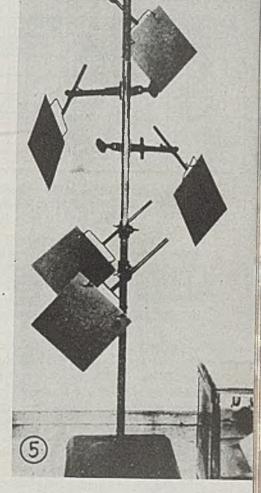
Coating technique showing panel holder for use in spray pattern method
